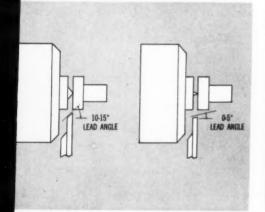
A decrease in lead or end cutting edge angle will reduce the amount of tool deflection that causes rapid wear at tool points.
